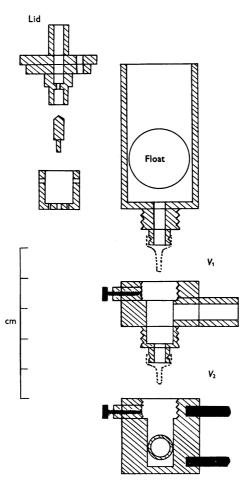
Perfusion pump type II. The needle valve is in the centre of the lid and is held in place by a small cup. Air can be removed from the valve chambers by opening the small screw-valves. The pulsations of the Dale-Schuster pump are transmitted through an air lock to the side arm of the upper valve chamber. Two brass plugs fixed to the lower valve chamber can be used to mount the pump on a duraluminium panel.
